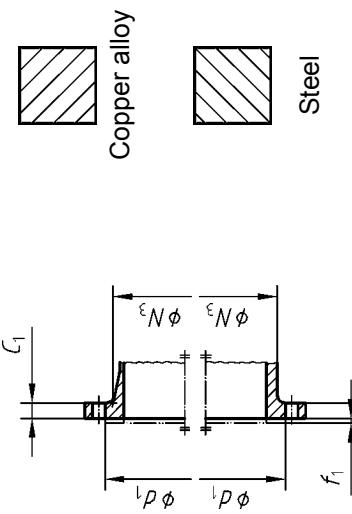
Dimensions of PN 6 flanges (see Table 5)
